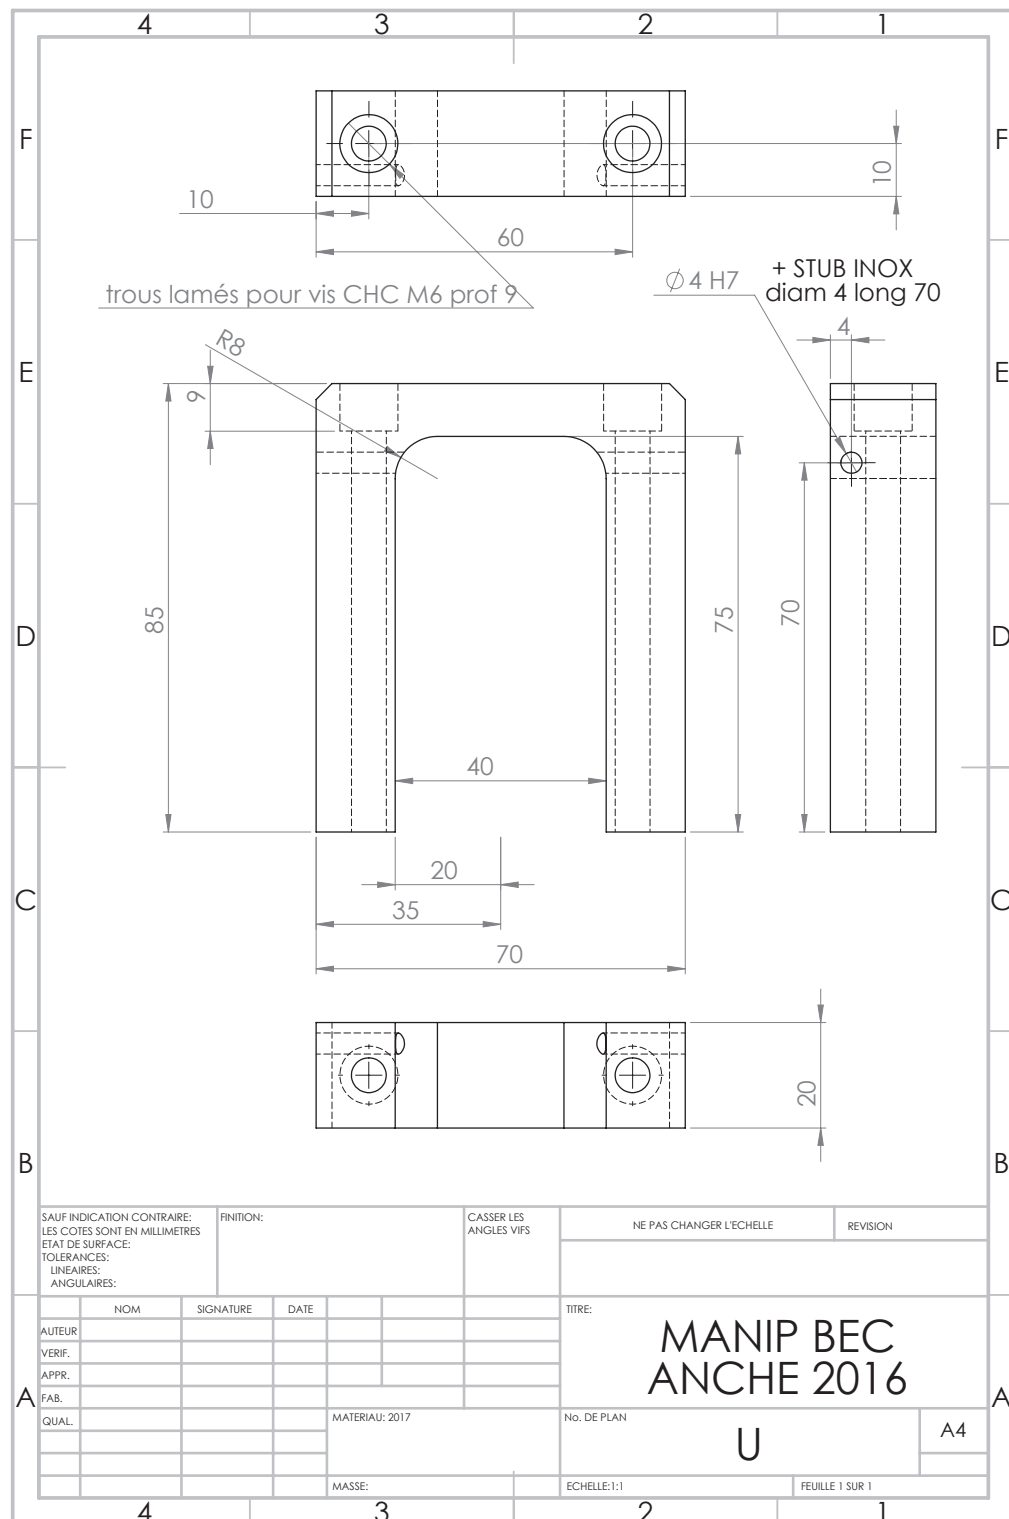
Dimensioned drawing of the artificial lip support (13). Provided by LAUM mechanical workshop.
